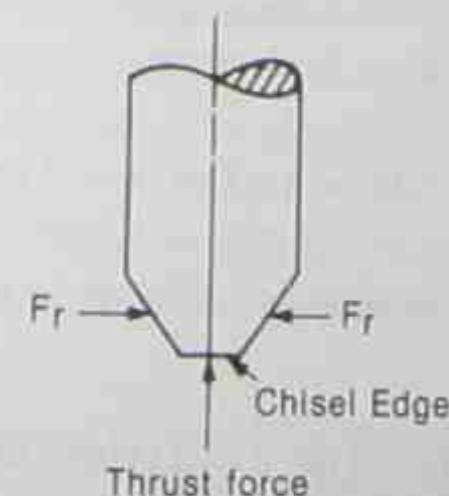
Schematic of forces on the cutting edges and chisel edge of a drill.
